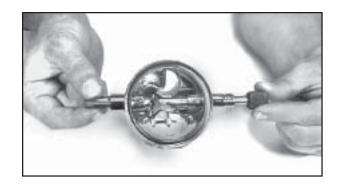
Use the KMDSI socket wrench to turn the nut on the inlet valve.
